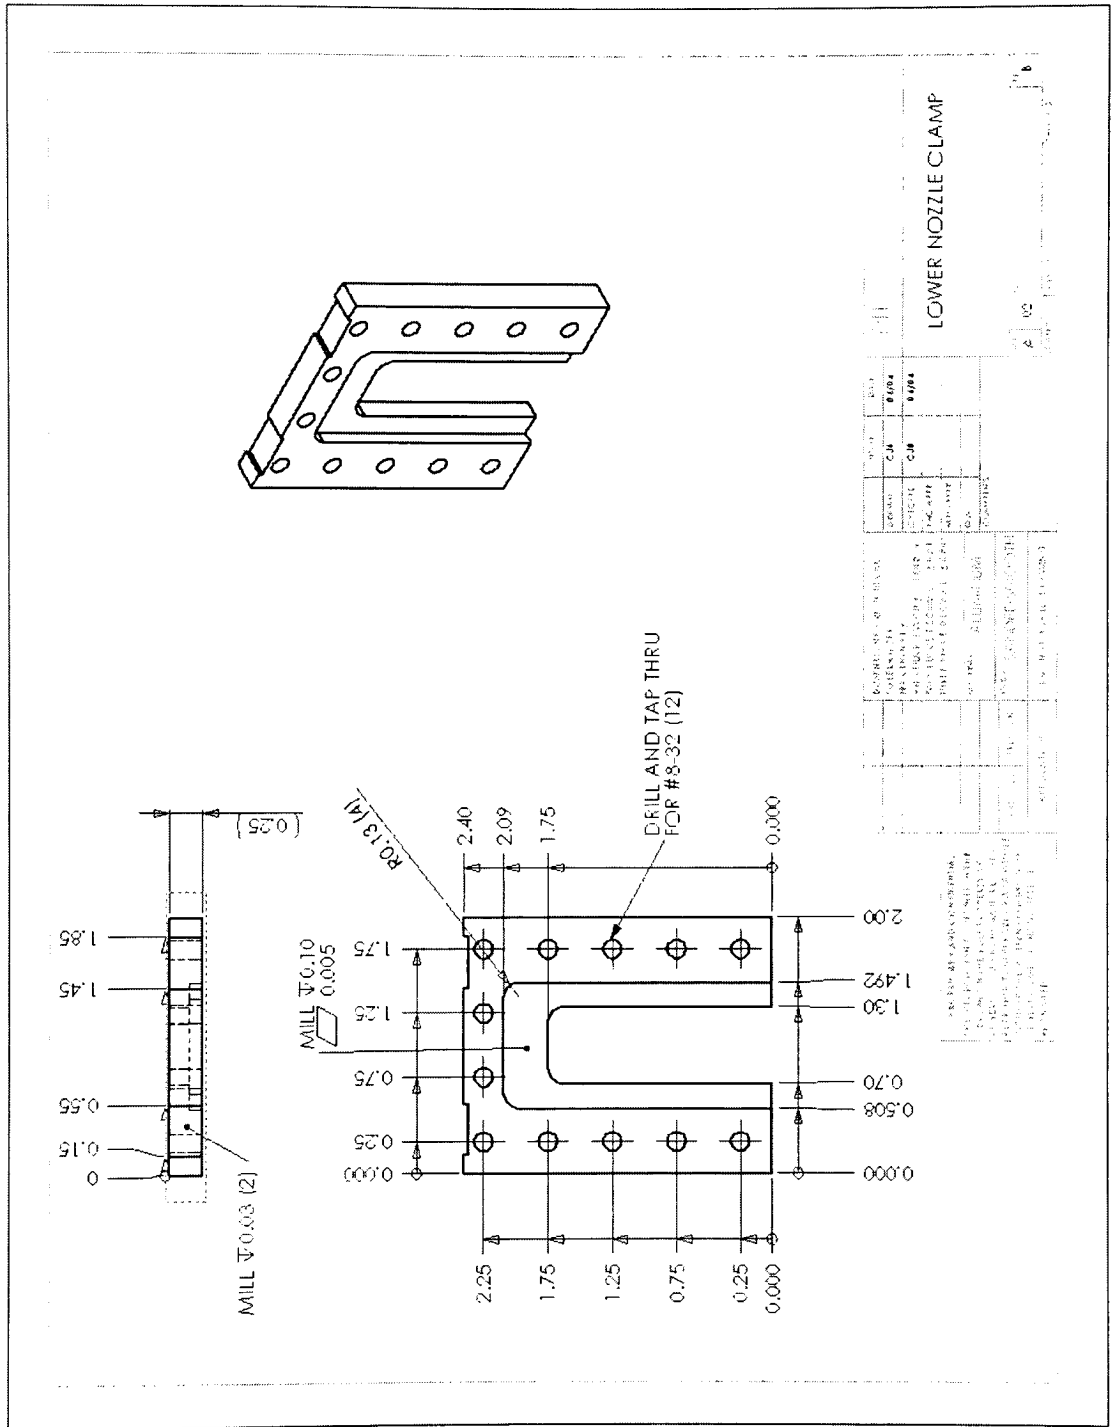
Lower Nozzle Clamp Detail Drawing
